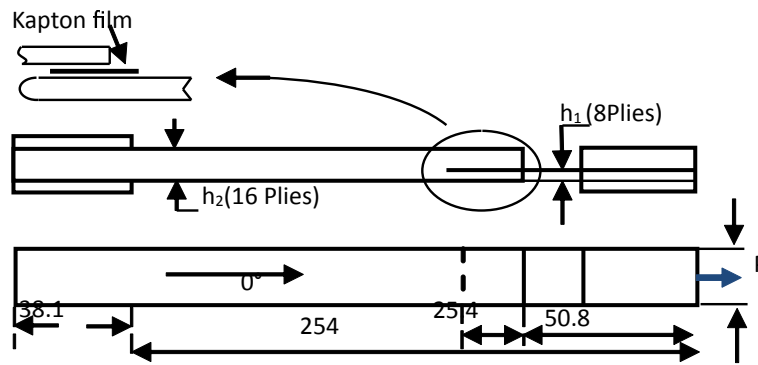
Shape and size of CLS specimen (All dimensions in mm)
